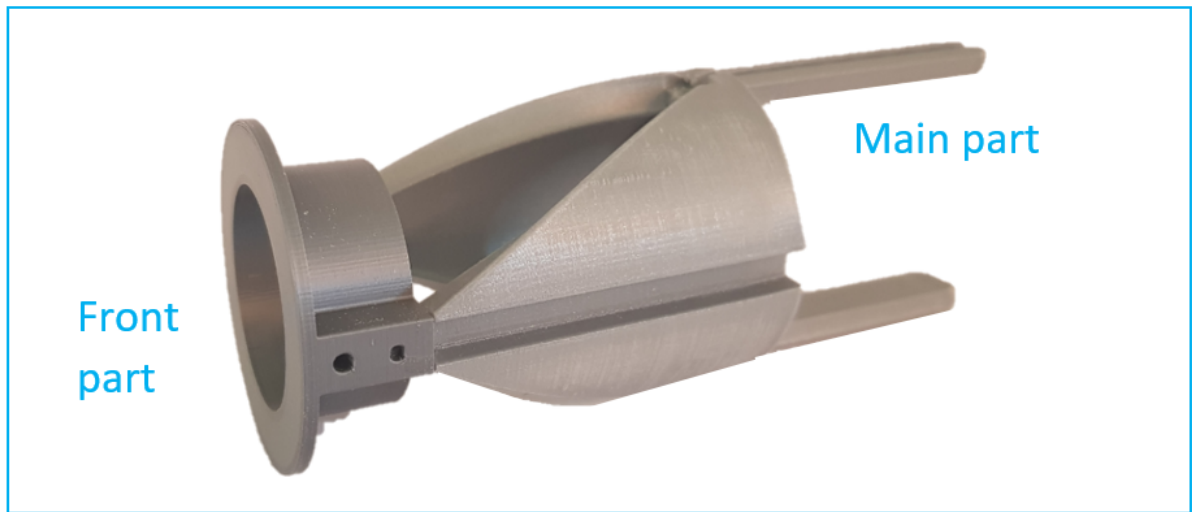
Picture of the translational motion parts from the 3D printed prototype
